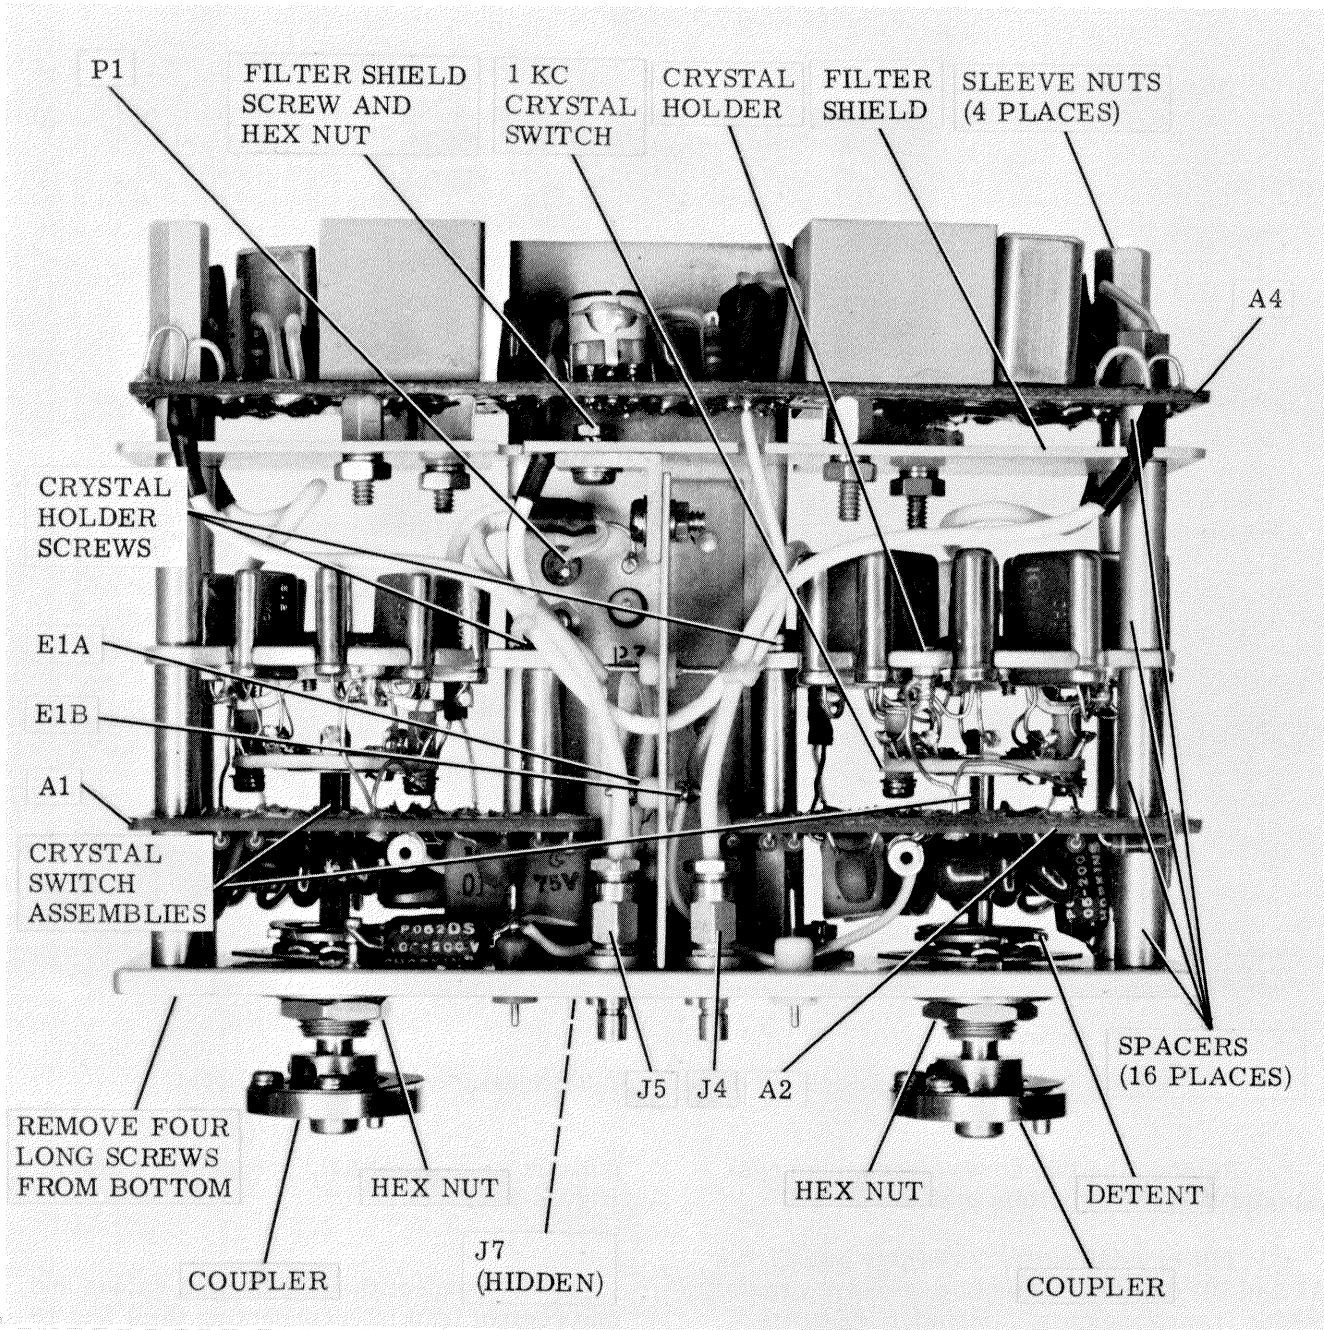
1 And 10KC Synthesizer Electronic Subassembly, Component Location
